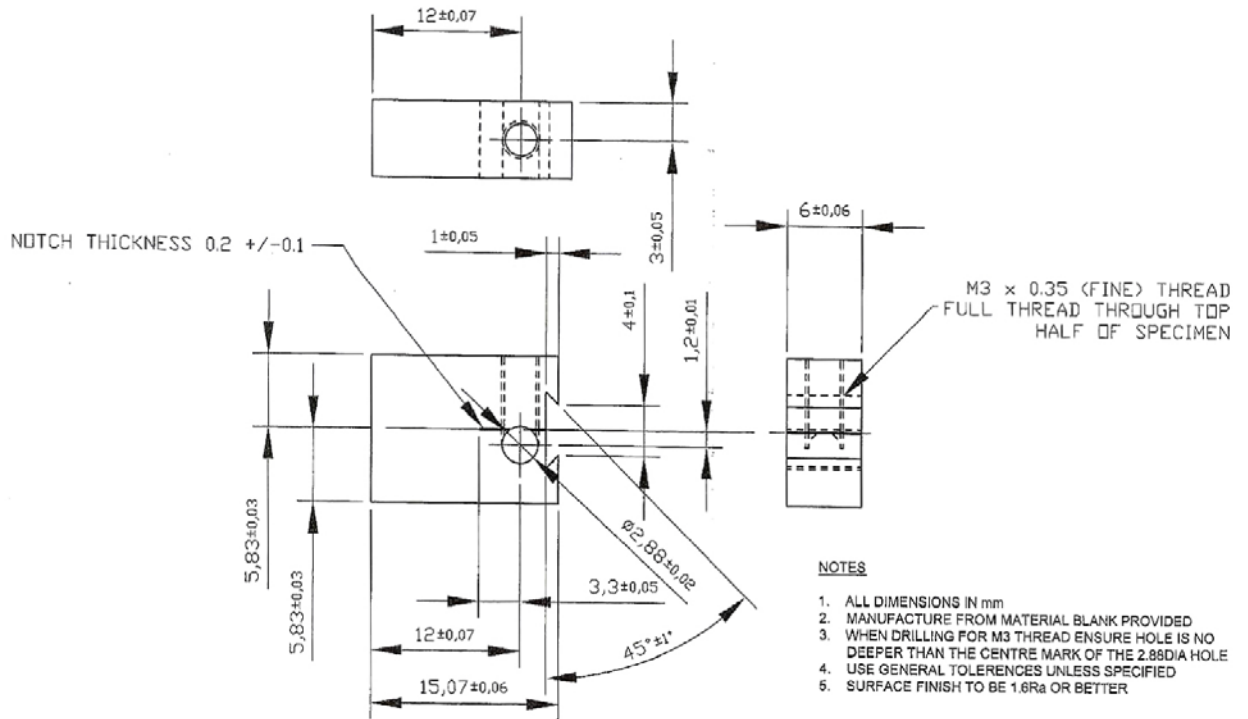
Design of Wedge Opening-loaded (WOL) specimens.
